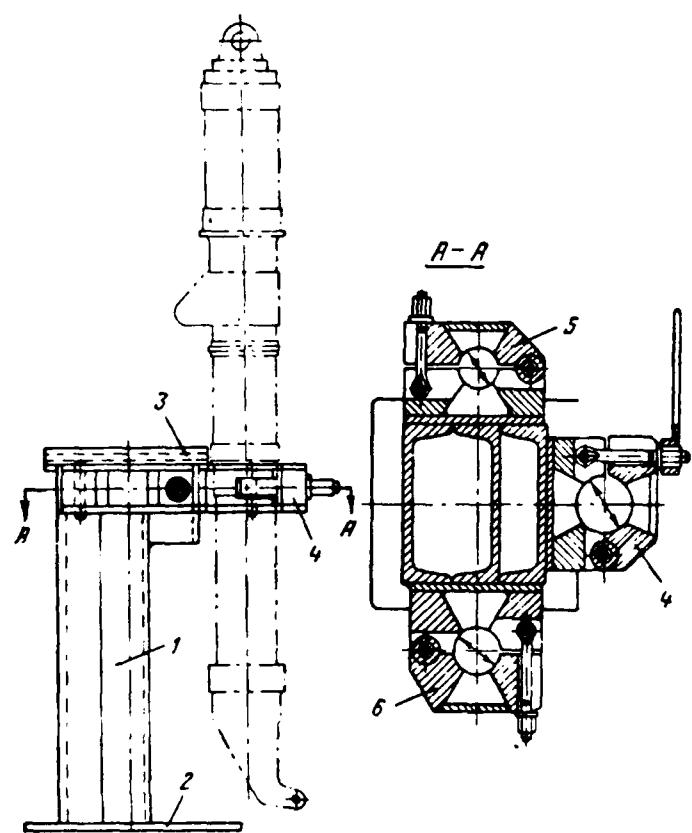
Device (column) for assembly of shock strut and entering it assemblies: 1 - strut; 2 - base/root; 3 - table; 4, 5 and 6 - binding clips of shock strut, stock/rod and diffuser.
